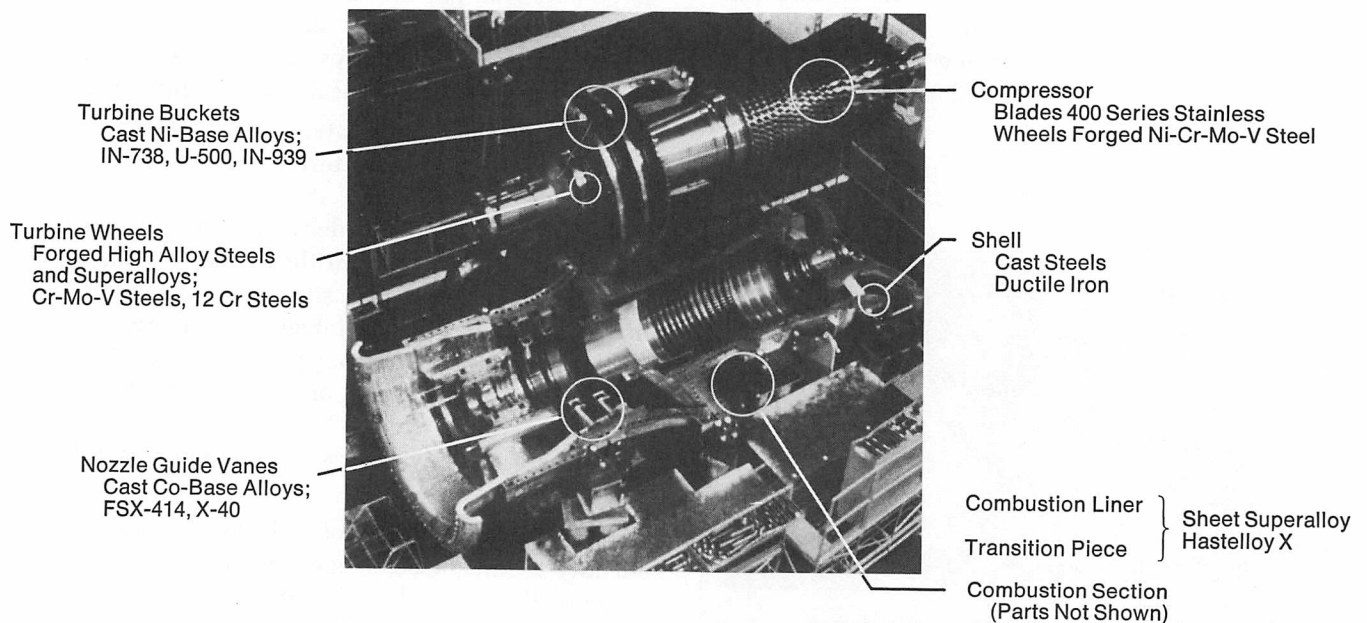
A heavy-duty gas turbine in assembly; typical materials for major components identified for class and examples.
